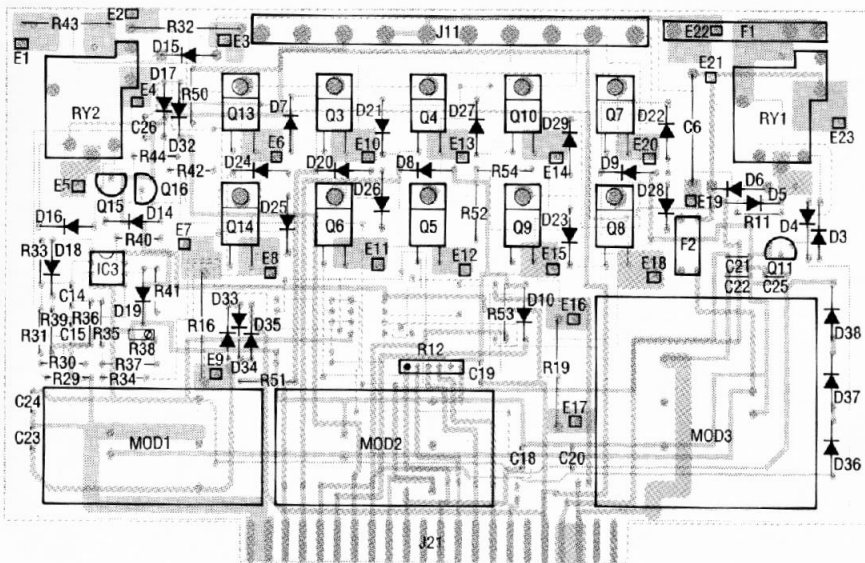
PARTS PLACEMENT DIAGRAM for the power board. Remember that several components must be mounted on the solder side of the board to leave room for the other components (see text).
